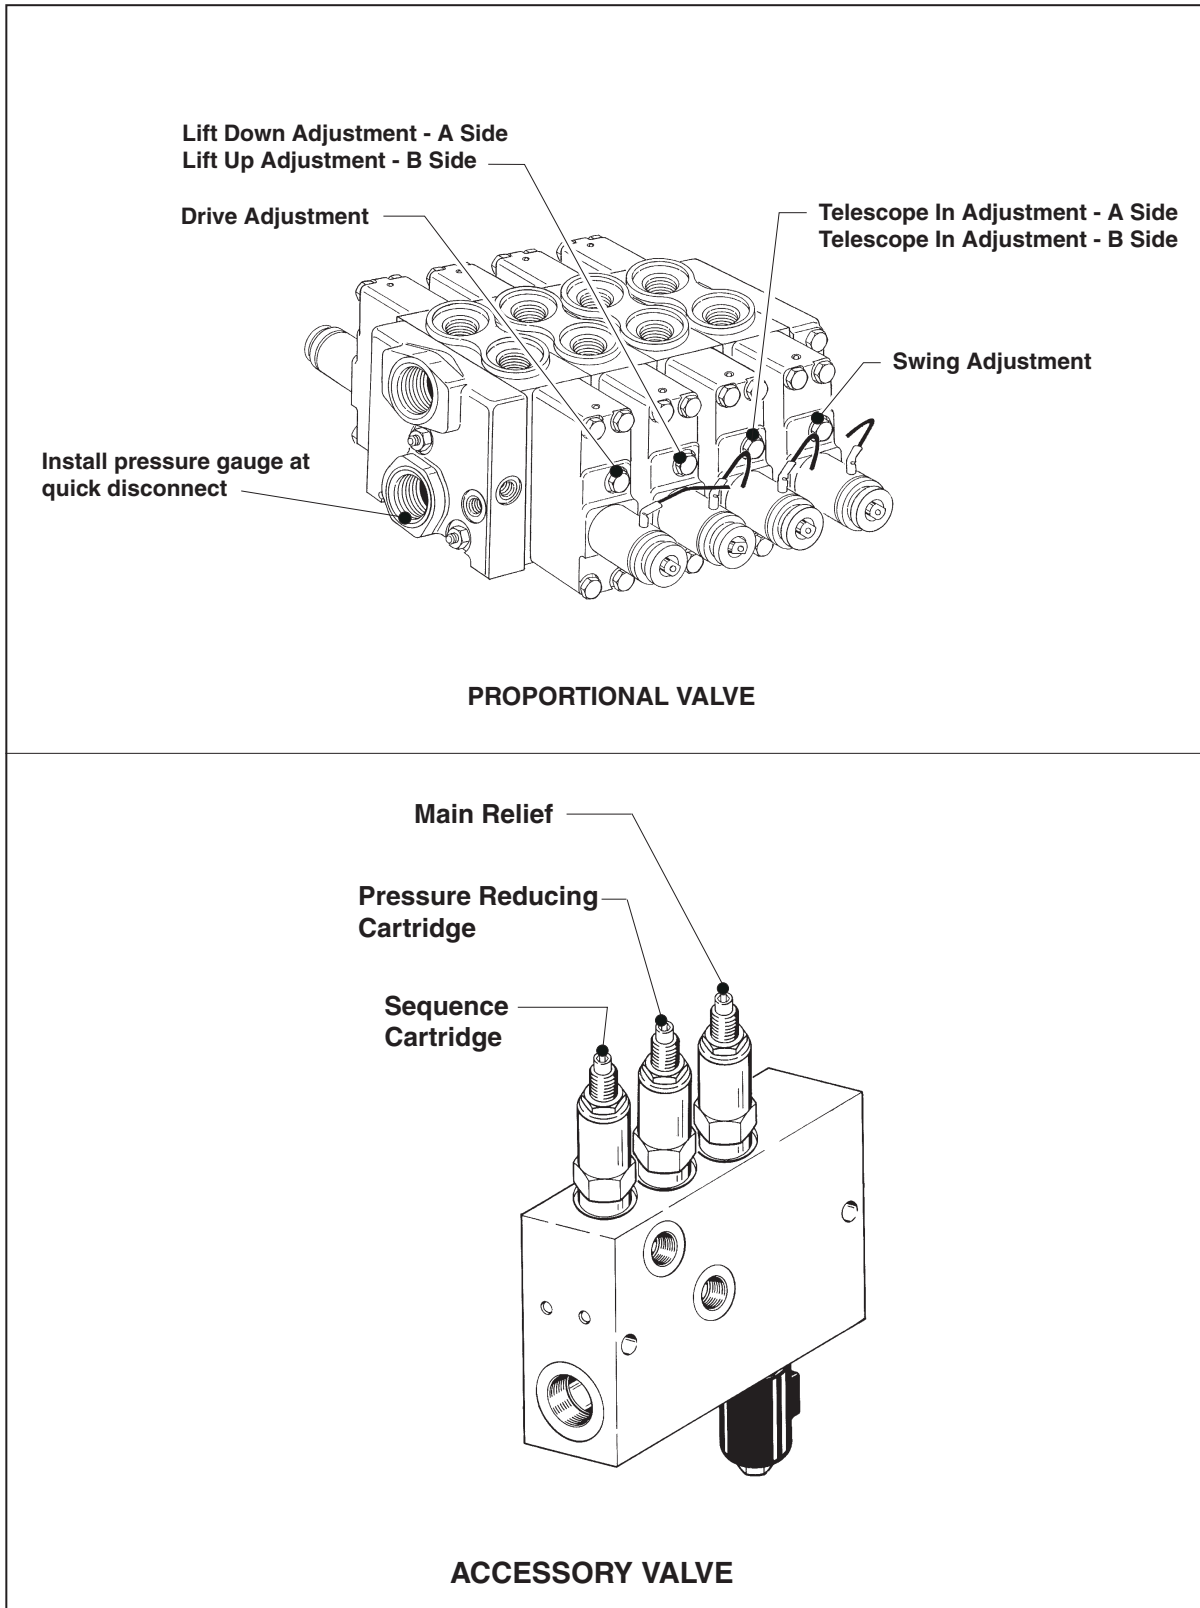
Pressure Setting Adjustments (Sheet 1 of 3)
